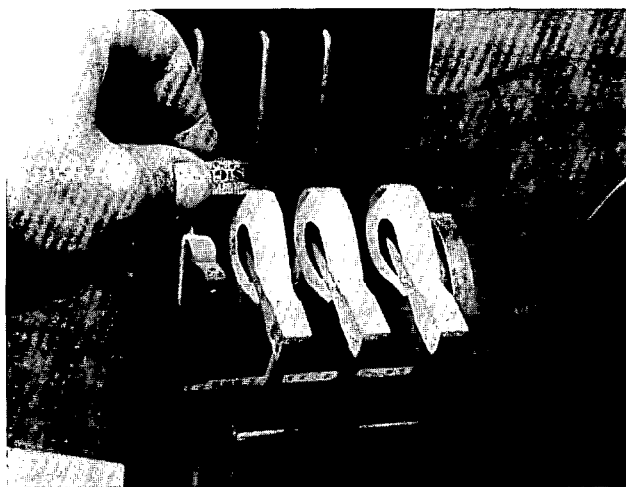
With the shank dry-fitted to the butt (no glue yet), re-mount the butt to the rail. Use the screw starter to hold the screw until it engages the action rail, then use a regular flange screwdriver to tighten. *Important: before tightening a wood screw, always turn it backwards first, until you feel it "drop" into the threads in the wood, then turn it clockwise to tighten.* This prevents accidental cross-threading and damage to the screw hole, and is especially important with critical parts like action rails and frequently removed parts like key slips, grand action stack-to-keyframe screws, etc. Check shank travel and paper the butt flange if necessary.
